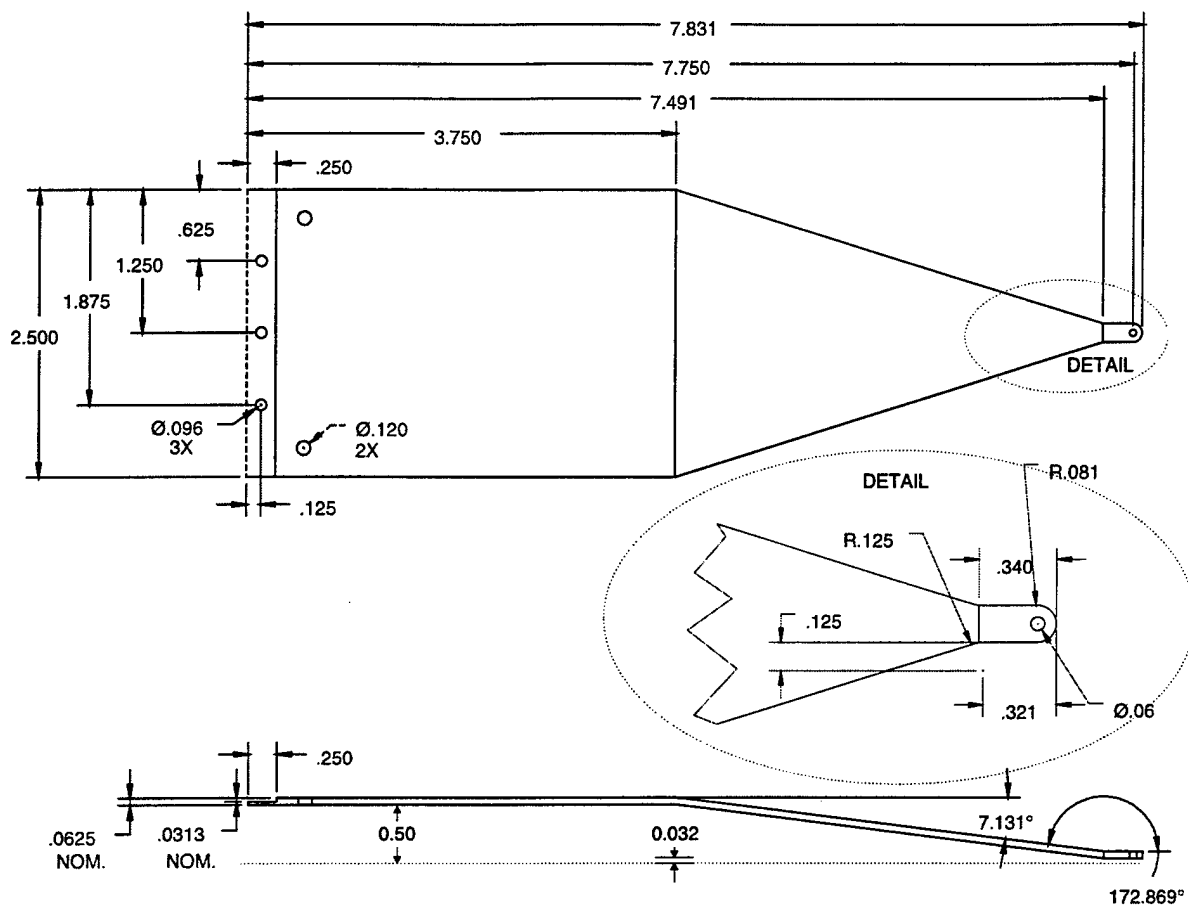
Detail of the test fixture wave launcher design. A constant 5:1 width-to-height ratio is maintained throughout.
